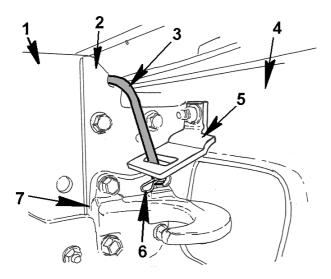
Torsion Bar Lower Bracket and Retaining Clip (Passenger Side Shown)
